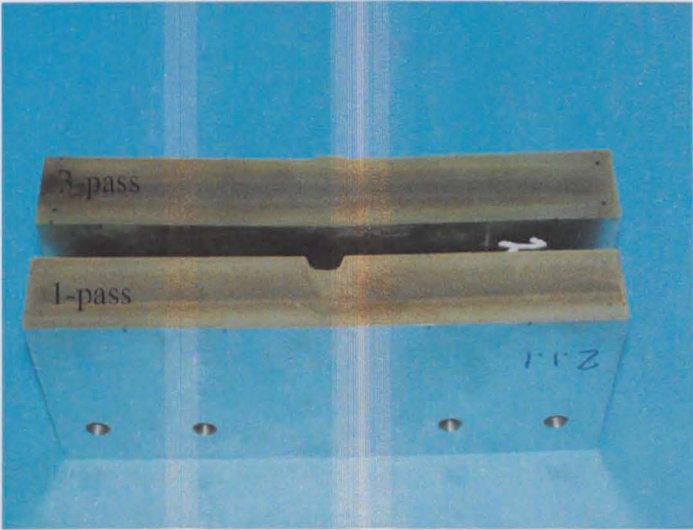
A picture of the 1-pass and 3-pass groove welded specimens after EDM cuts. The holes which were used for clamping the material can be seen bottom of the specimen in figure.
